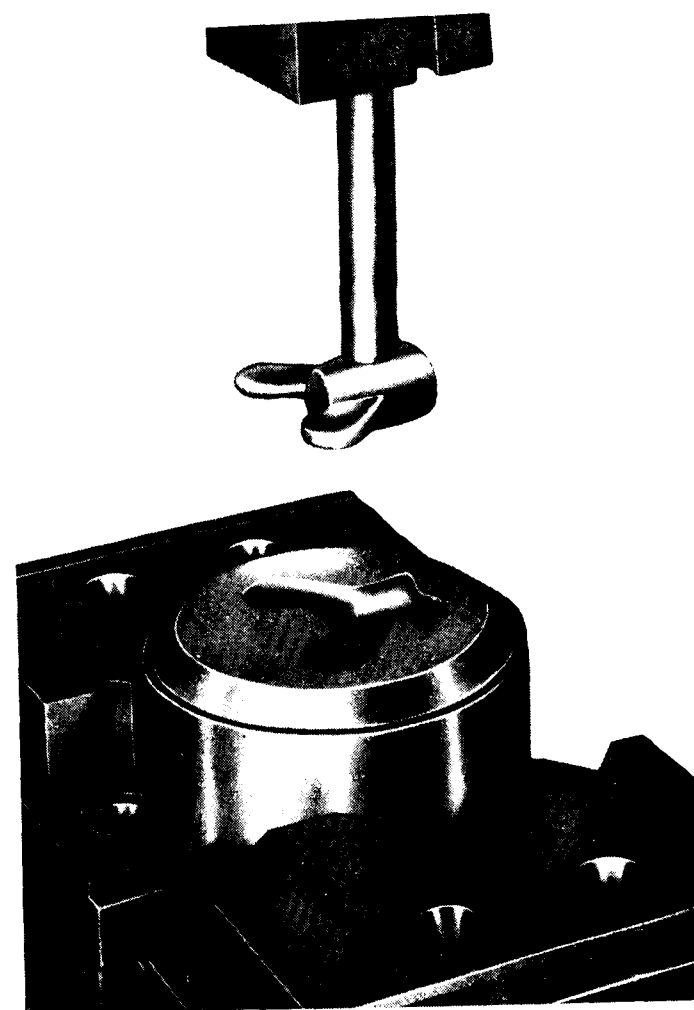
Electric Spark Erosion Engraving Machine VJK-2.
